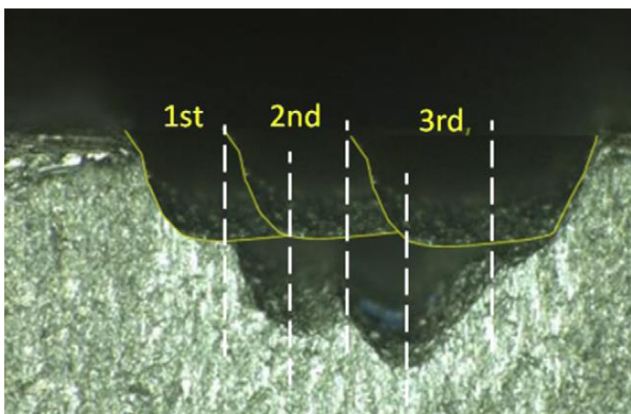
Demonstration of first and subsequent jet footprints when attempting to ensure controlled depth milling with AWJ [47]
